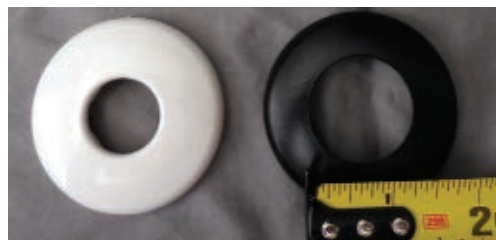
The shallow flanges before and after expanding the size of the hole.
